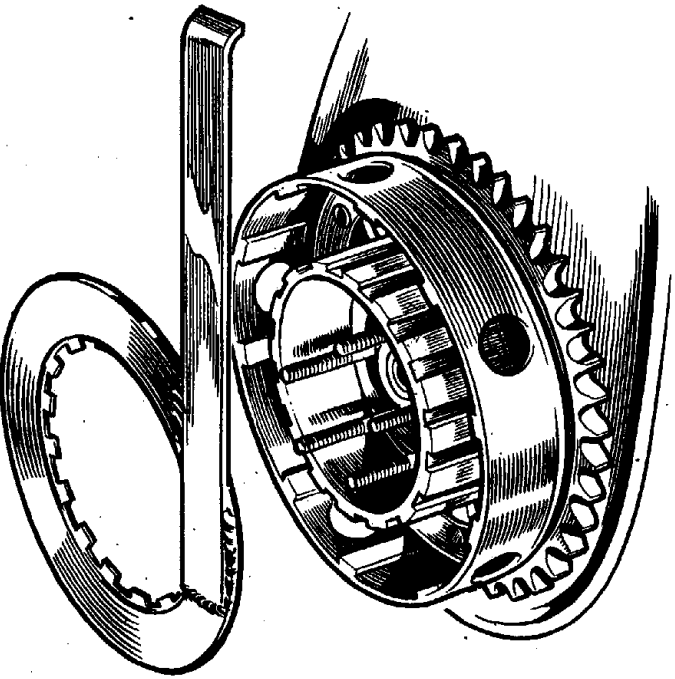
TOOL FOR PREVENTING THE GEARBOX MAINSHAFT TURNING WHILST THE CRANKSHAFT SHOCK ABSORBER AND CLUTCH HUB NUTS ARE TIGHTENED.
